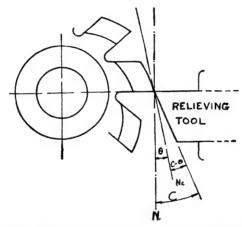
Reduction of Clearance due to Cutter Relief Angle
